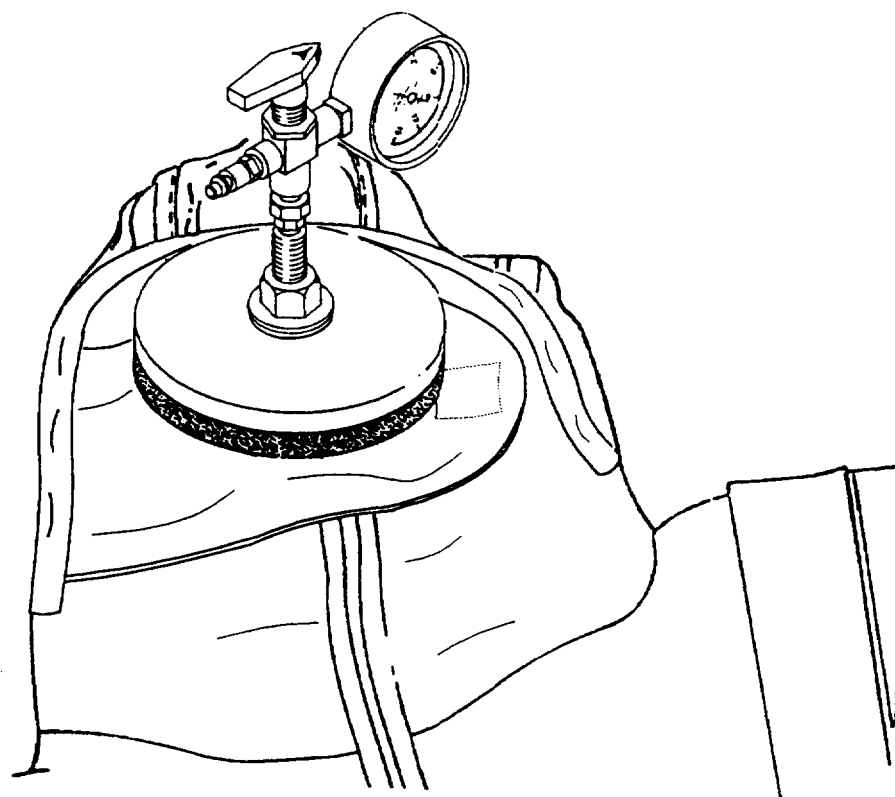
Face Plate Assembly (Top and Bottom Plates Fastened Together)
